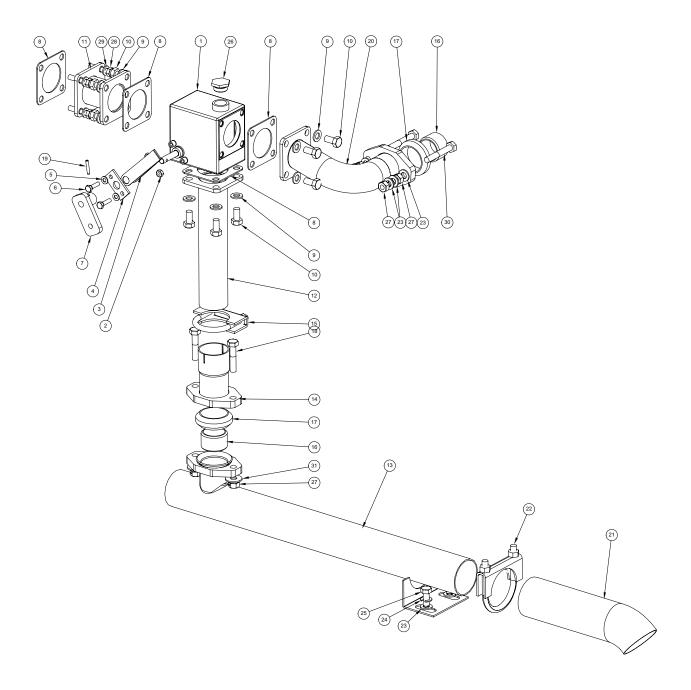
Engine Assembly - Right View D-6153 Rev -
